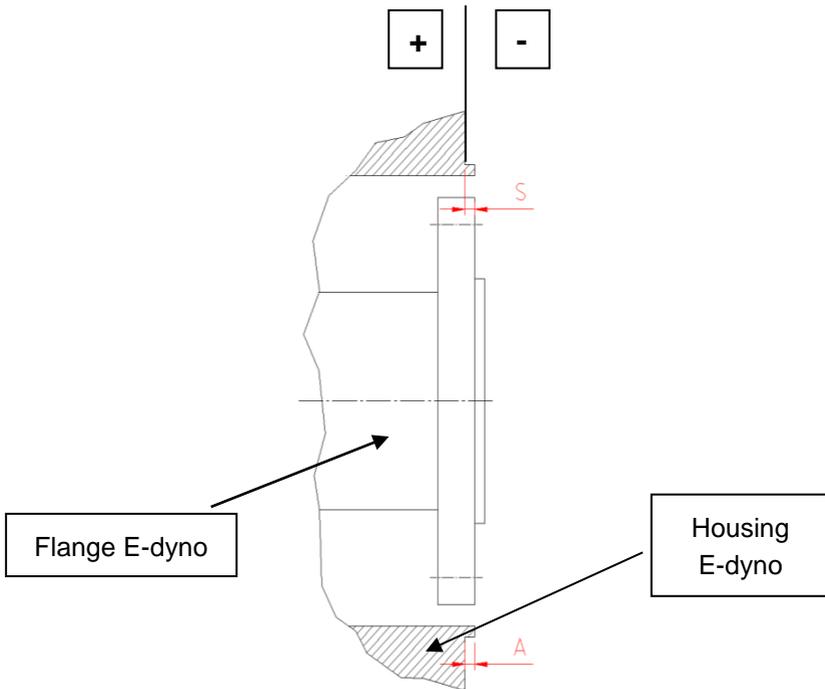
Offset between end faces (dynamometer flange/dynamometer-housing)
